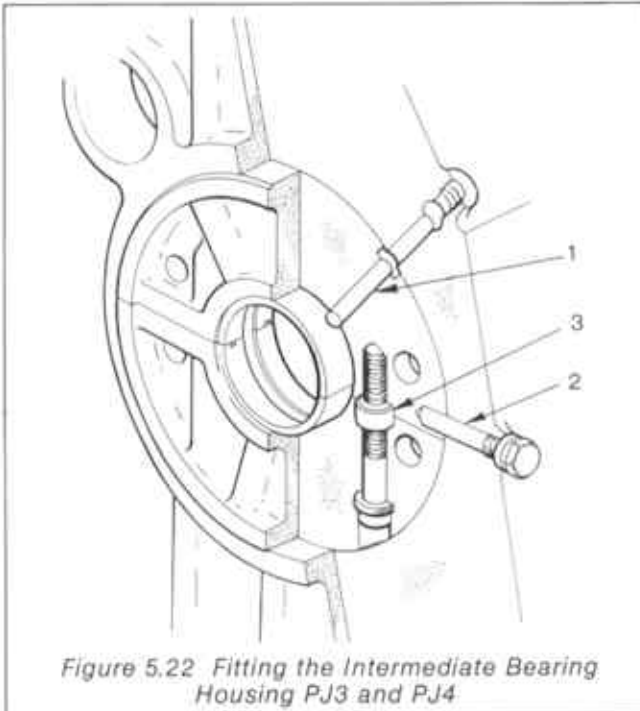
Fitting the Intermediate Bearing Housing PJ3 and PJ4
